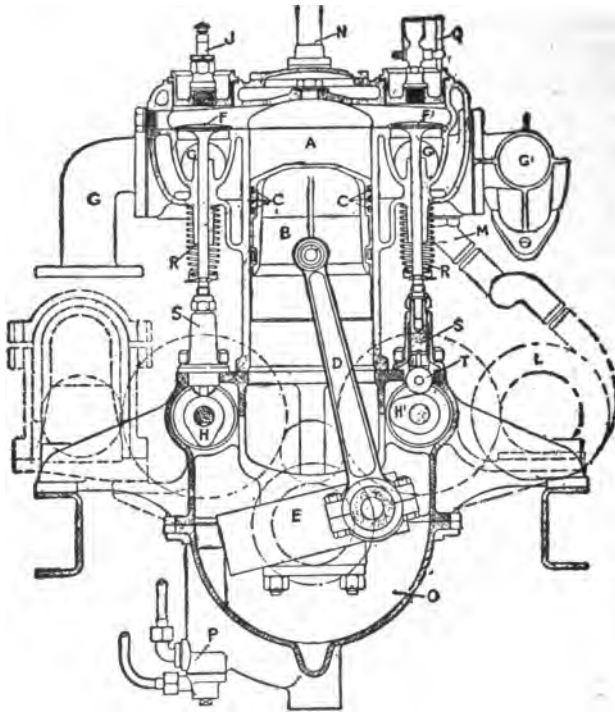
CROSS SECTION OF A 35 H. P. ENGINE.
